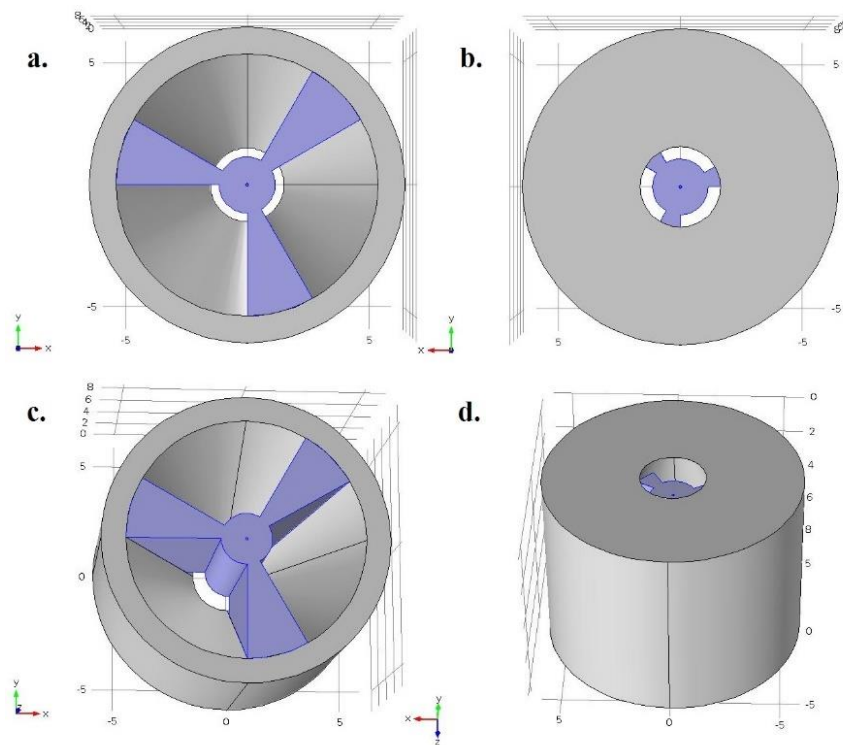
Schematic illustrations of full length spinneret prototype 4 solid view, (a. top view, b. bottom view, c. inclined top view, d. inclined bottom view)
